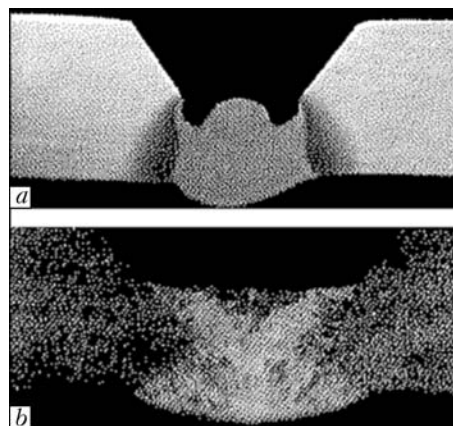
Macrosection of welded joint performed using MAW with rod electrodes (a) and automatic STT welding (b)
